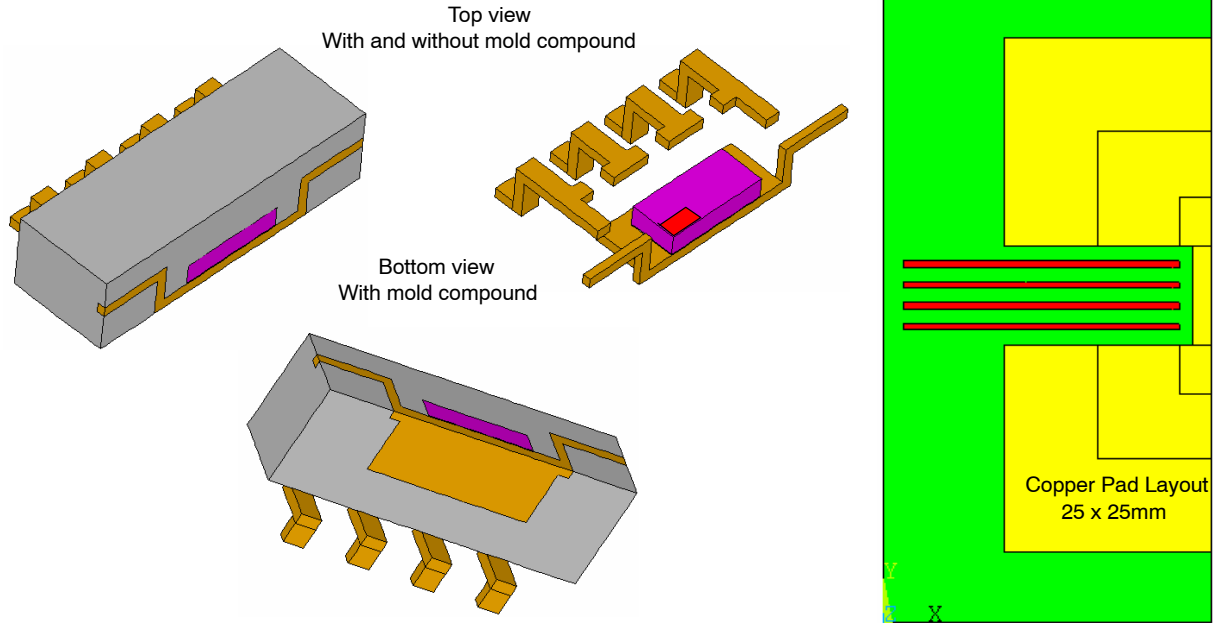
Internal Construction of the Package and PCB Layout for Multiple Pad Area
